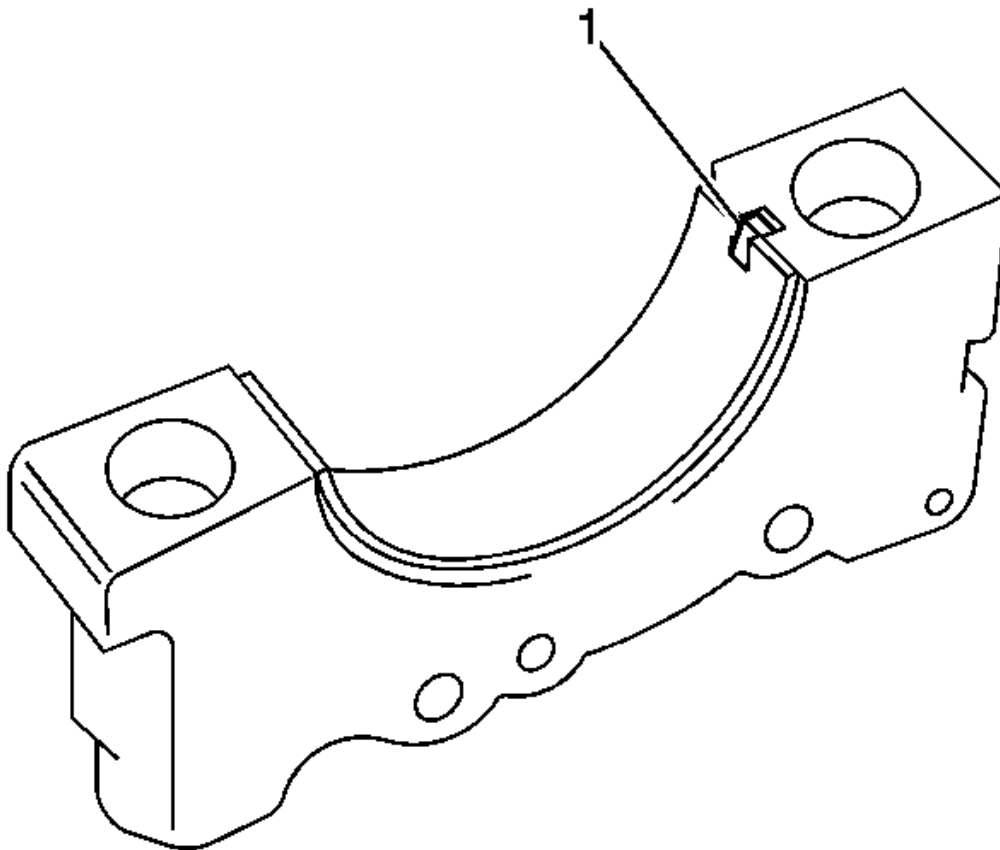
View Of Lower Crankshaft Bearing Installation In Bearing Cap
